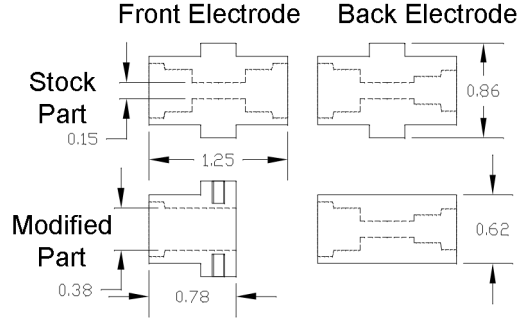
Schematic illustrating how stock Ultra-Torr fittings were modified to form the cold cathode source.
